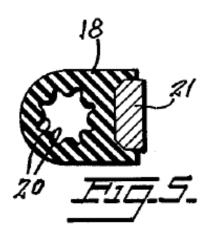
of Markowitz is a cross-sectional view, showing part of the arrangement of housing 18 and magnet 21.
